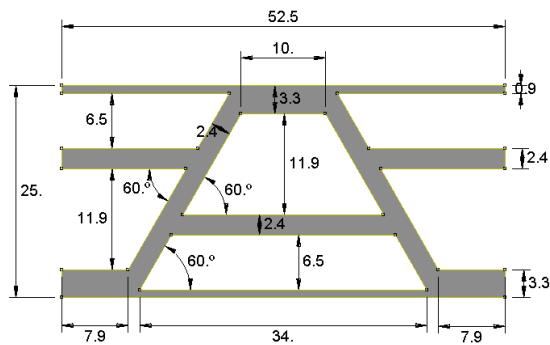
Cross-section dimensions of (3-8-3) model with reinforcement layer in the longitudinal mode introduced by symbol "A".
